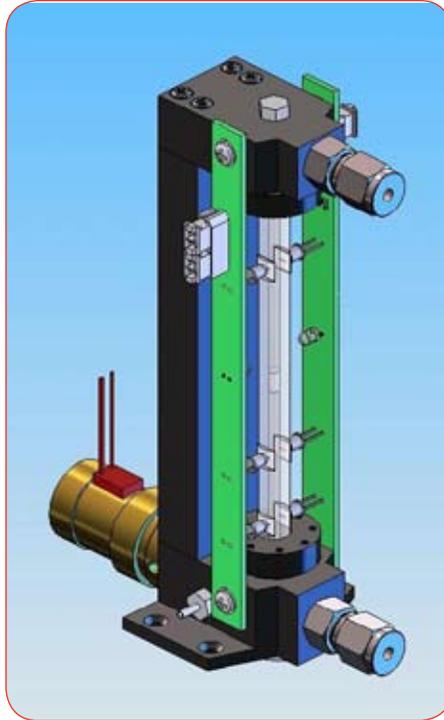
Internal Cell Construction, Showing Tube and Optical Detectors
